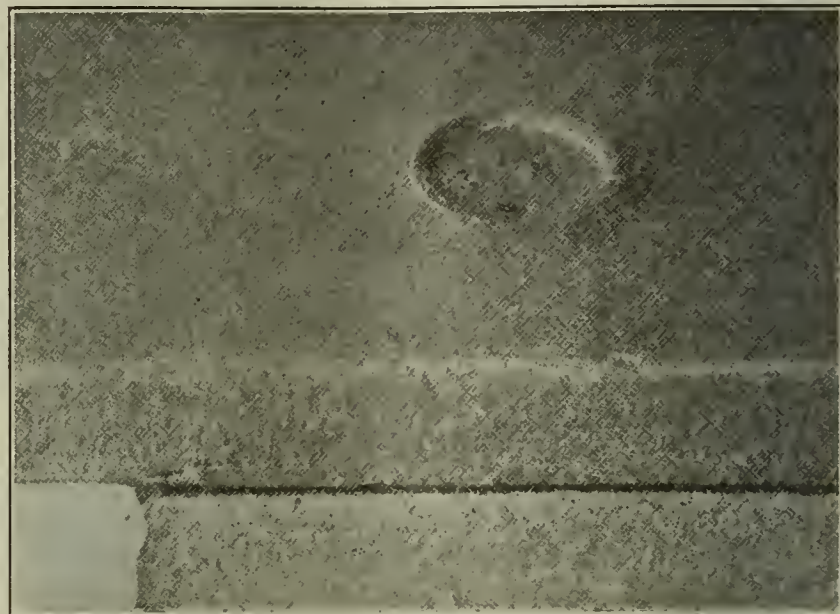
CRATER FORMED BY SPOT WELDER WHEN JOINING TWO STEEL SHEETS
